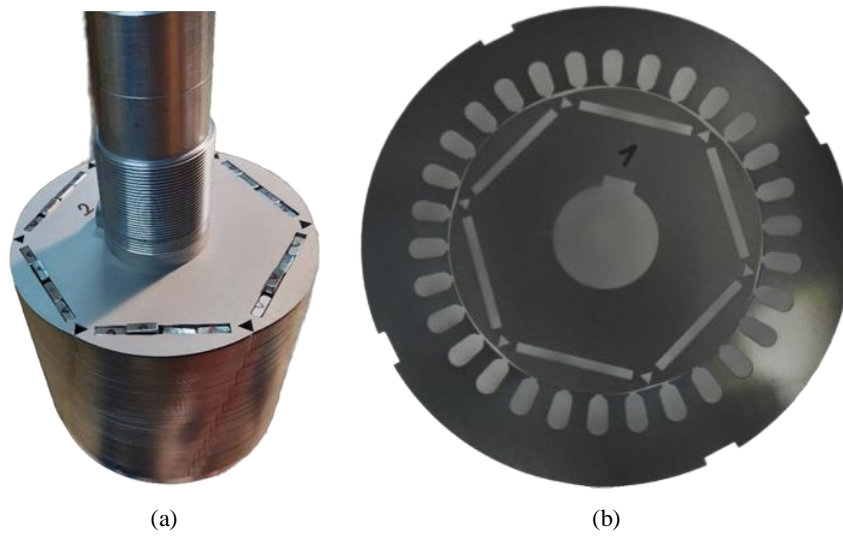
(a) Rotor structure of five-phase IPMSM (b) A single stator plate
